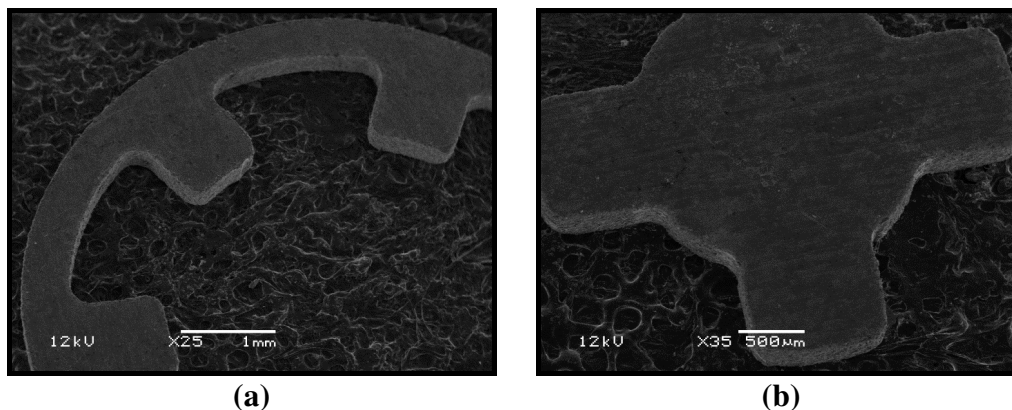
Microscopic photo of the cutting region of the rotor and stator using the electroerosion wire cutting process – (a) Stator – (b) Rotor.
